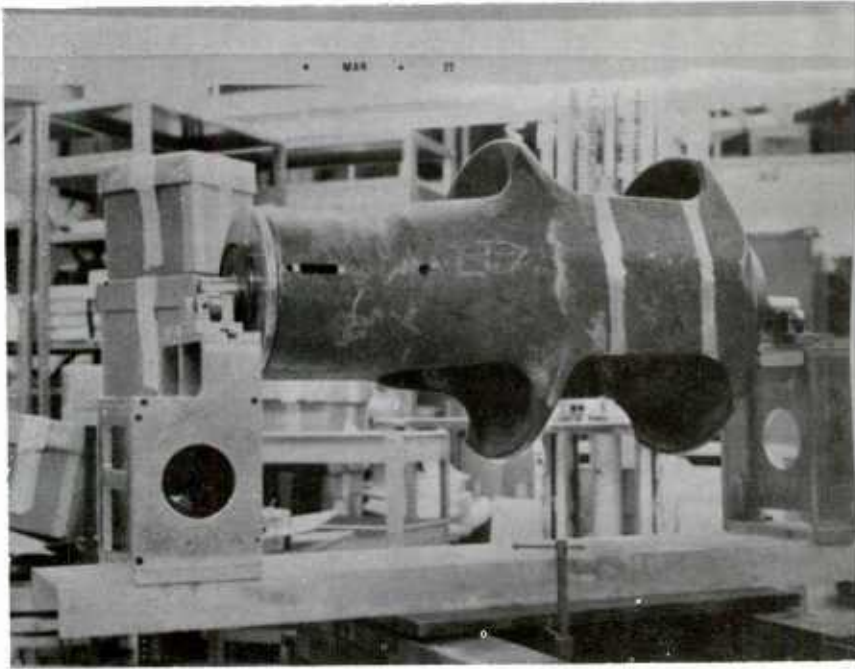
The Muzzle Brake as Positioned in the Revolving Weld Fixture.
